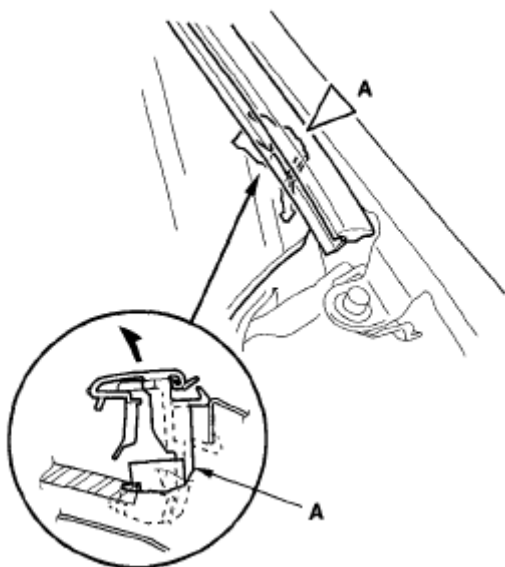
Detaching Bottom Clip At Lower Corner Of Windshield
